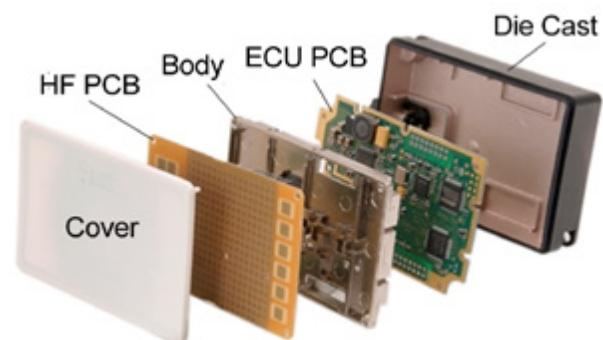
Exploded view of a typical automotive radar module. Picture courtesy of Autoliv.
